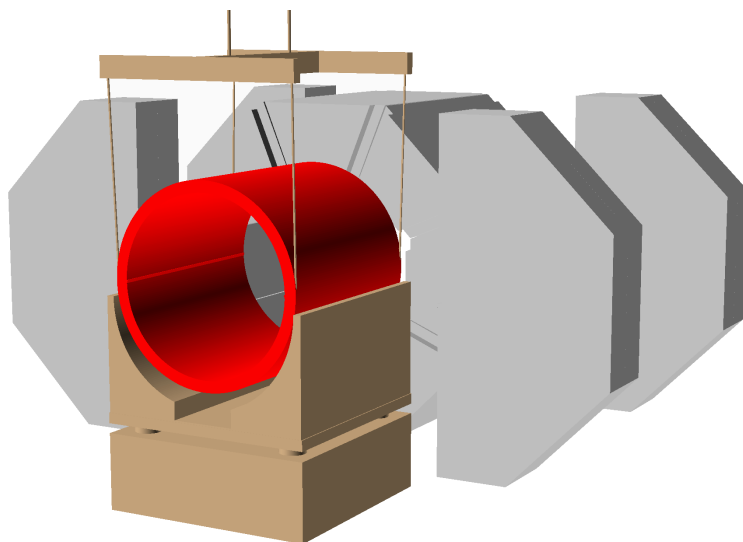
(Var-1) The magnet is lowered by a crane into the cradle. The cradle contains four lifting jacks for adjusting the height and aligning the magnet with the RS barrel. The weight of the magnet is 16 tons.
